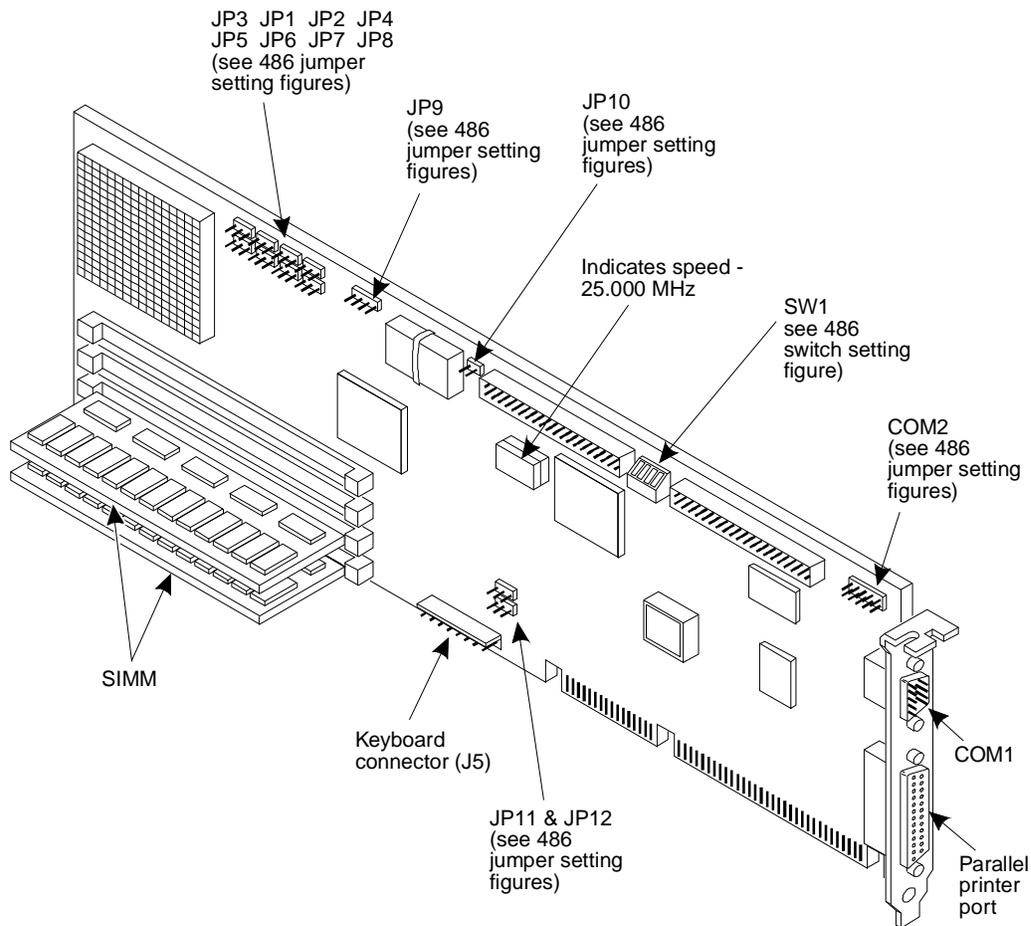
486 CPU Circuit Card and Jumper Locations, Version 1
